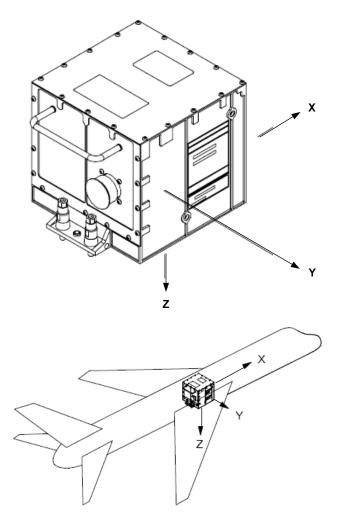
(2 of 2) IMU Type 21 Outline - Rear View
